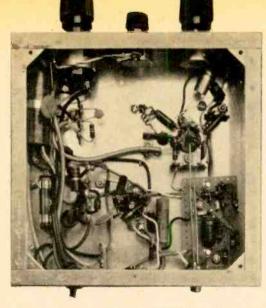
Receiver underside. Install small components before connecting the shielded wires going from upper left corner to V2 and squelch board.
